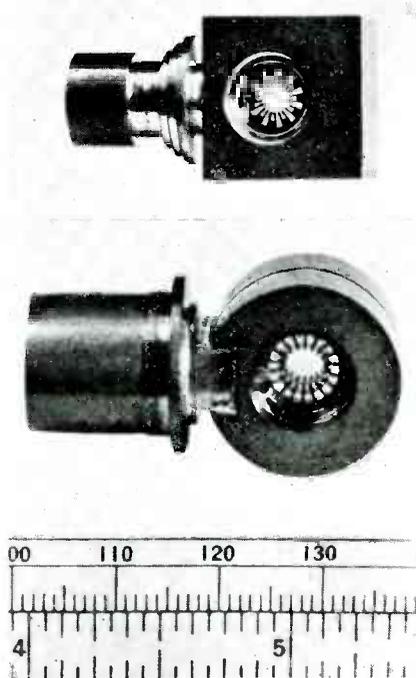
Method used to hob out cavities in copper blank. All flow flash is trimmed off in a lathe
